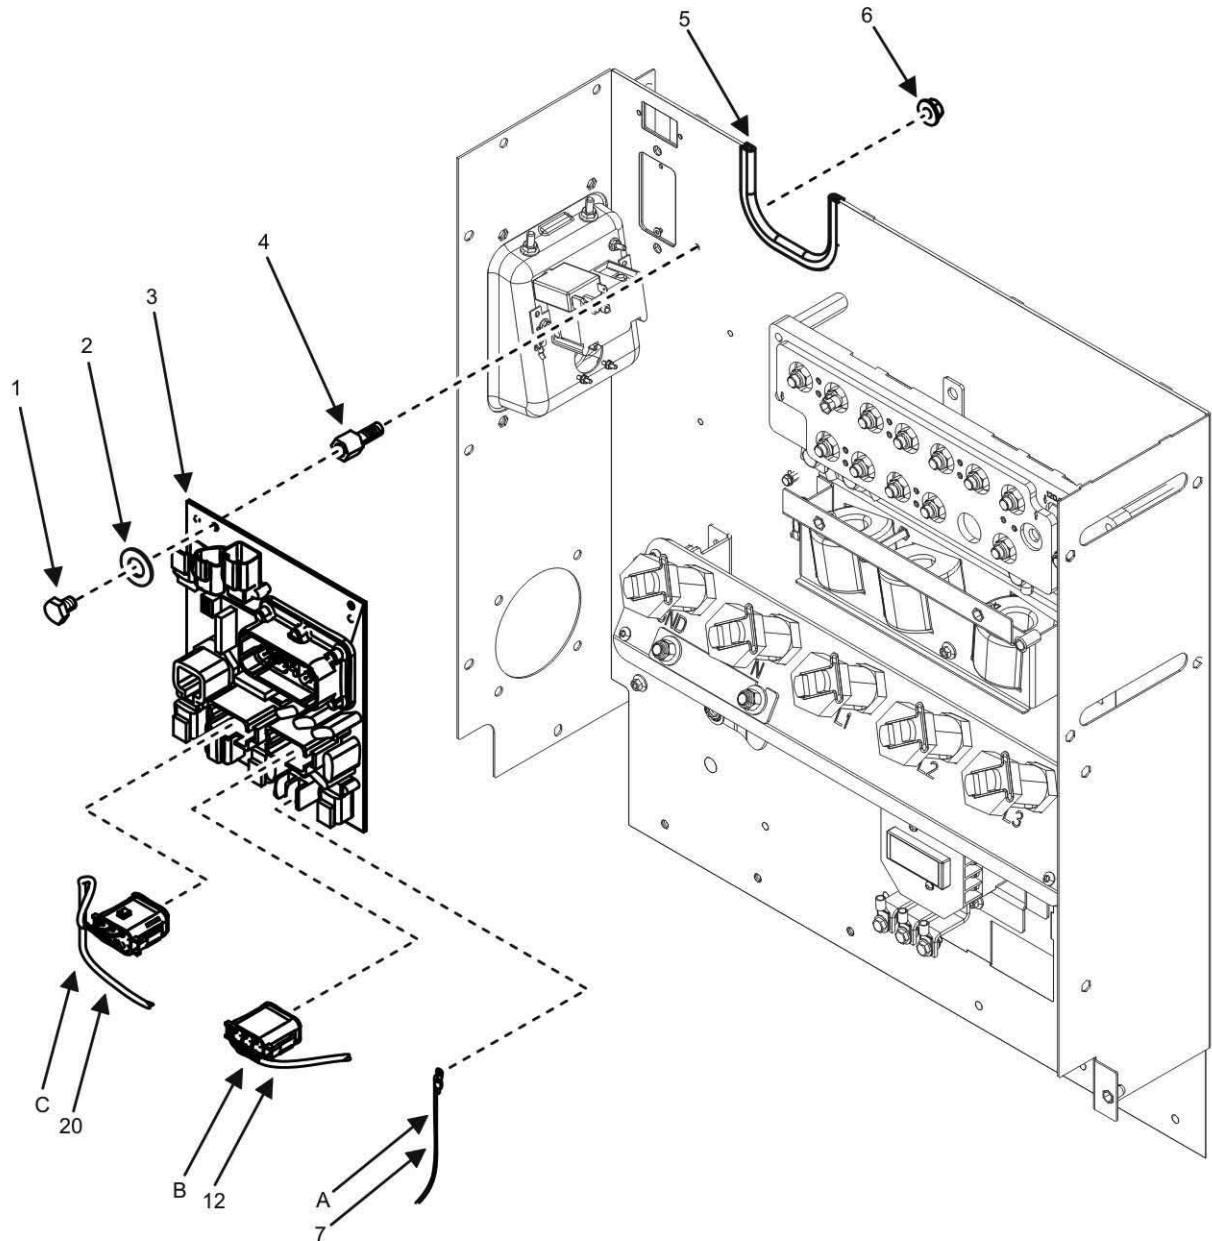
Printed Circuit Board Module (Sheet 1 of 2).
